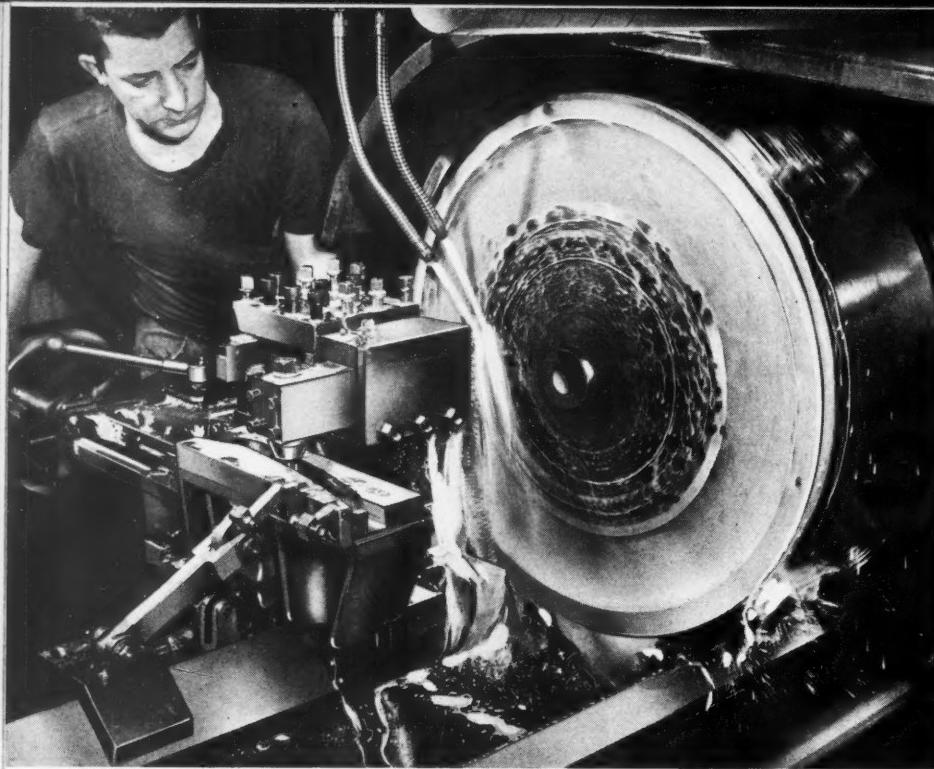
Carbide tools remove excess beads from welded turbine assembly and finish-machine the faces. A cam attachment on the lathe causes the toolpost to follow the forged contour of the turbine wheel
